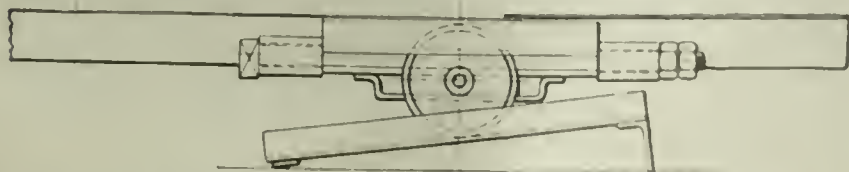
ROLLER UNDER JOINT AT TROUGH SECTIONS
